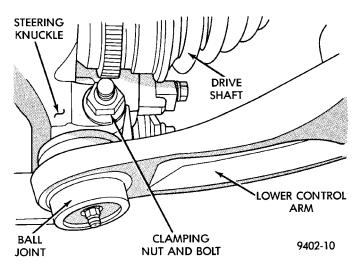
Tighten Steering Knuckle Clamp Bolt
